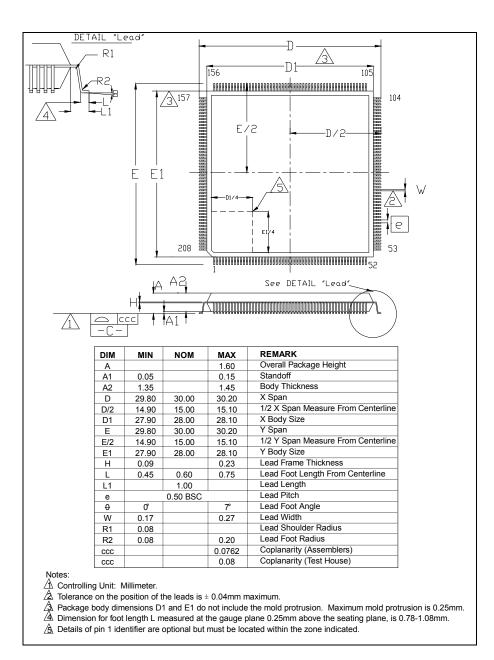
208 PIN TQFP PACKAGE OUTLINES
